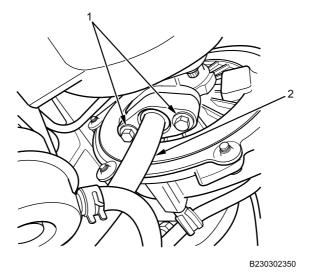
Turbocharger Lubricant Drain Tube Connection.
